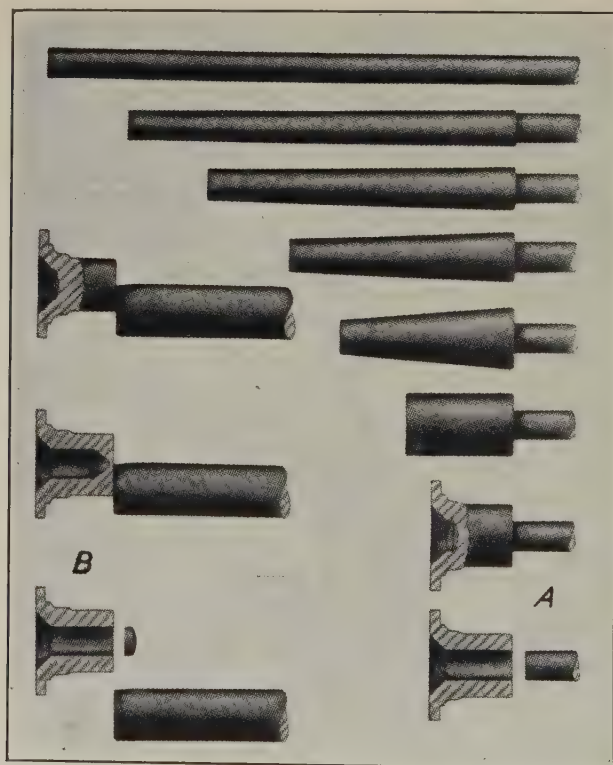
Illustrating Progressive Upsetting Operations in Forming a Cupped Guide. "A" Shows the Old Method. "B" Shows the Latest Method.
